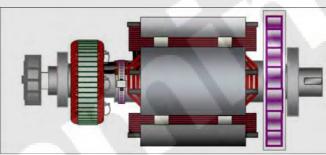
TWO BEARING ALTERNATOR ROTOR SHOWING SHAFT WITH KEYWAY FOR FLEXIBLE COUPLING (AT RIGHT)
